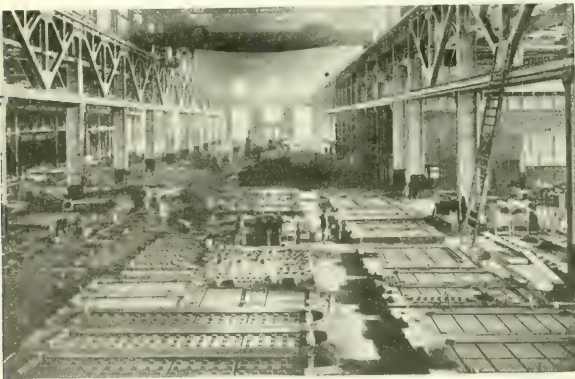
GENERAL VIEW OF FOUNDRY MELTING DEPARTMENT
